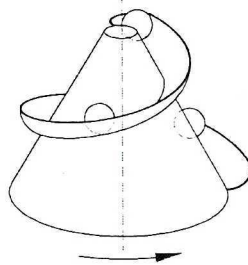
Forming pieces into spherical forms between trough and cone
